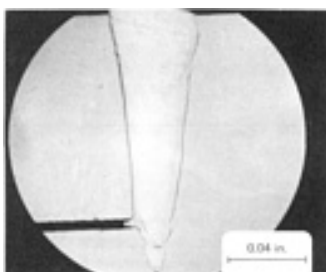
ELECTRON-BEAM BRAZE WELD IN BERYLLIUM. COURTESY OF ROCKWELL INTERNATIONAL ENERGY SYSTEMS GROUP
